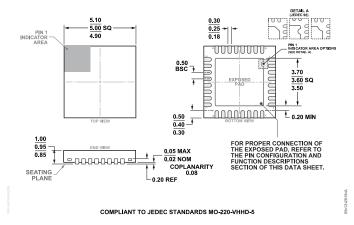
32-Lead Lead Frame Chip Package [LFCSP] 5 mm × 5 mm Body and 0.95 mm Package Height (CP-32-30) Dimensions shown in millimeters
